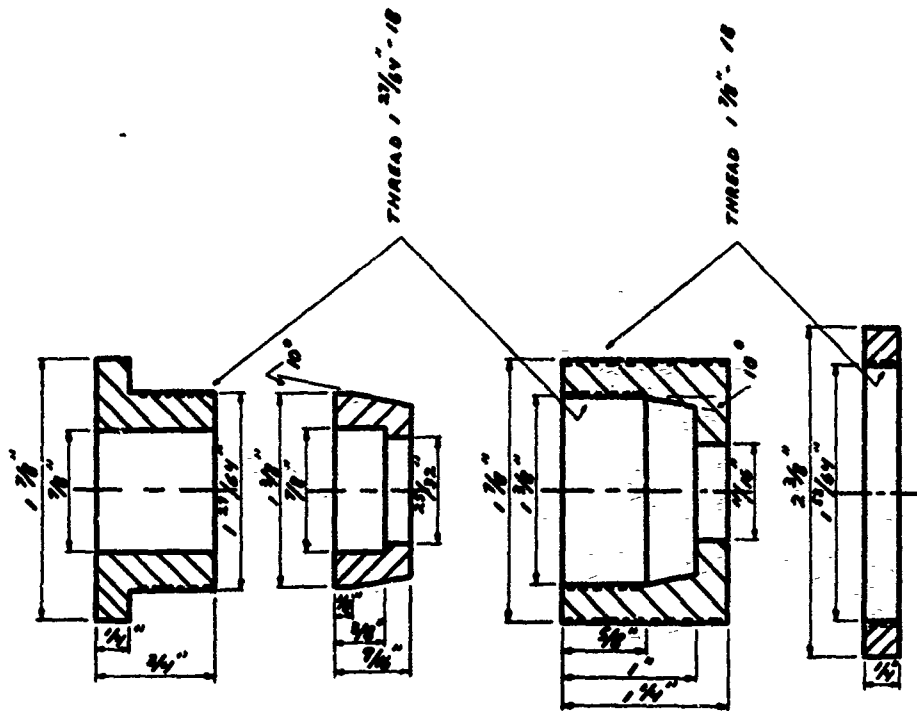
CONSTRUCTION DETAILS OF EXPLODING WIRE LIGHT SOURCE UNIT
